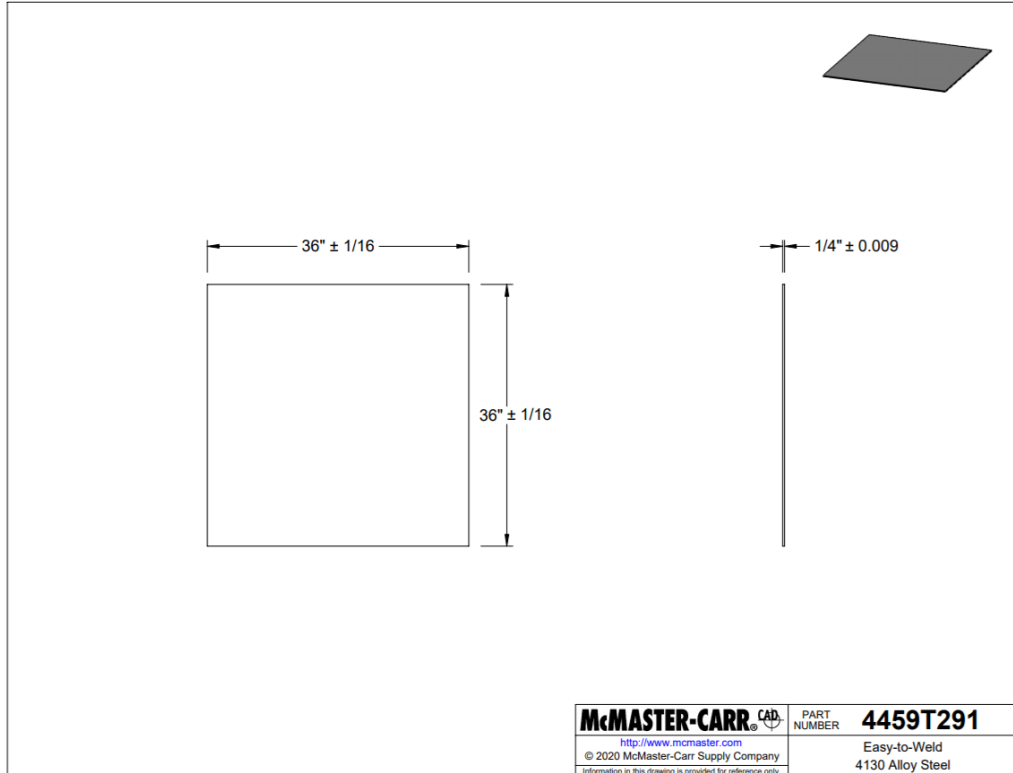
Drawing for First Wheel Plate Used on Base and Mid Section Provided by McMaster-Carr
